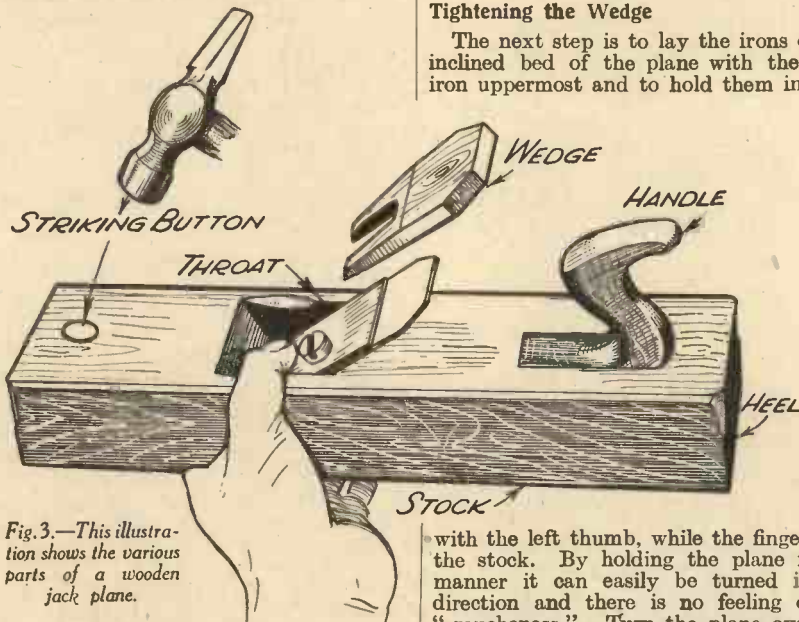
This illustration shows the various parts of a wooden jack plane.
